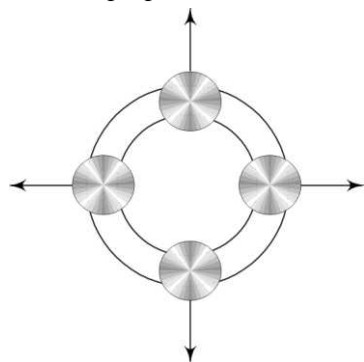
Top view of a ring casting with risers. Here, distortion will be radially outwards making dimensional changes in top portion of the casting
